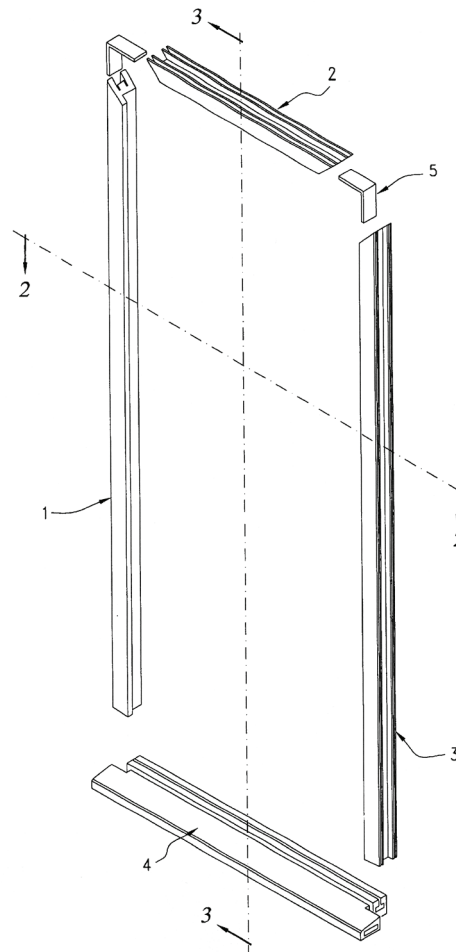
Adjustable door frame assembly. [Adapted from Wang, C. K.-U., US Patent 6,530,183, Mar. 11, 2003.]
